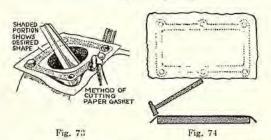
Cutting a gasket for the lower part of the cylinder, where it fits to the crank case.
